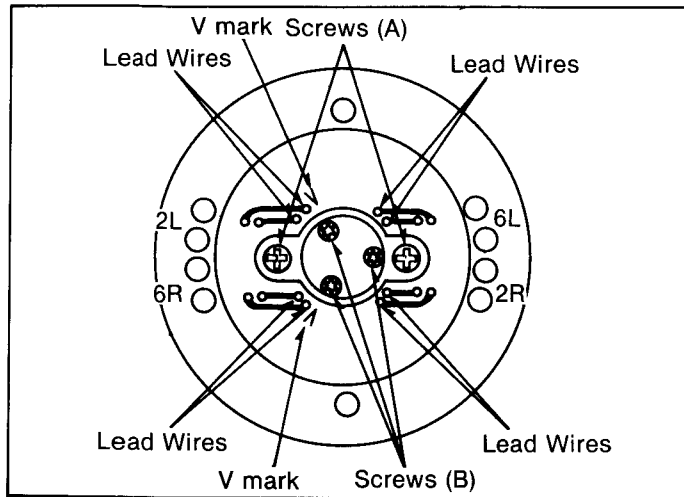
Replacement of Upper Cylinder Unit-(1)
